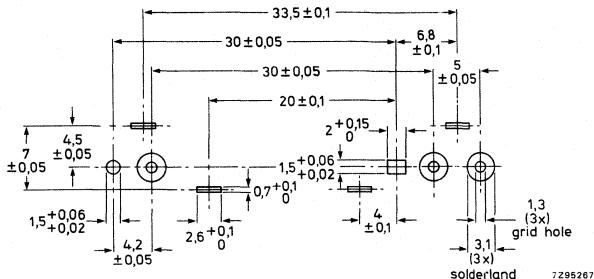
Hole pattern in the printed-wiring board, viewed from the component side. The 4 oblong holes 2,6 x 0,7 are required for the accomodation of the p.w. tags of the tin plated shield, see Fig. 3.
